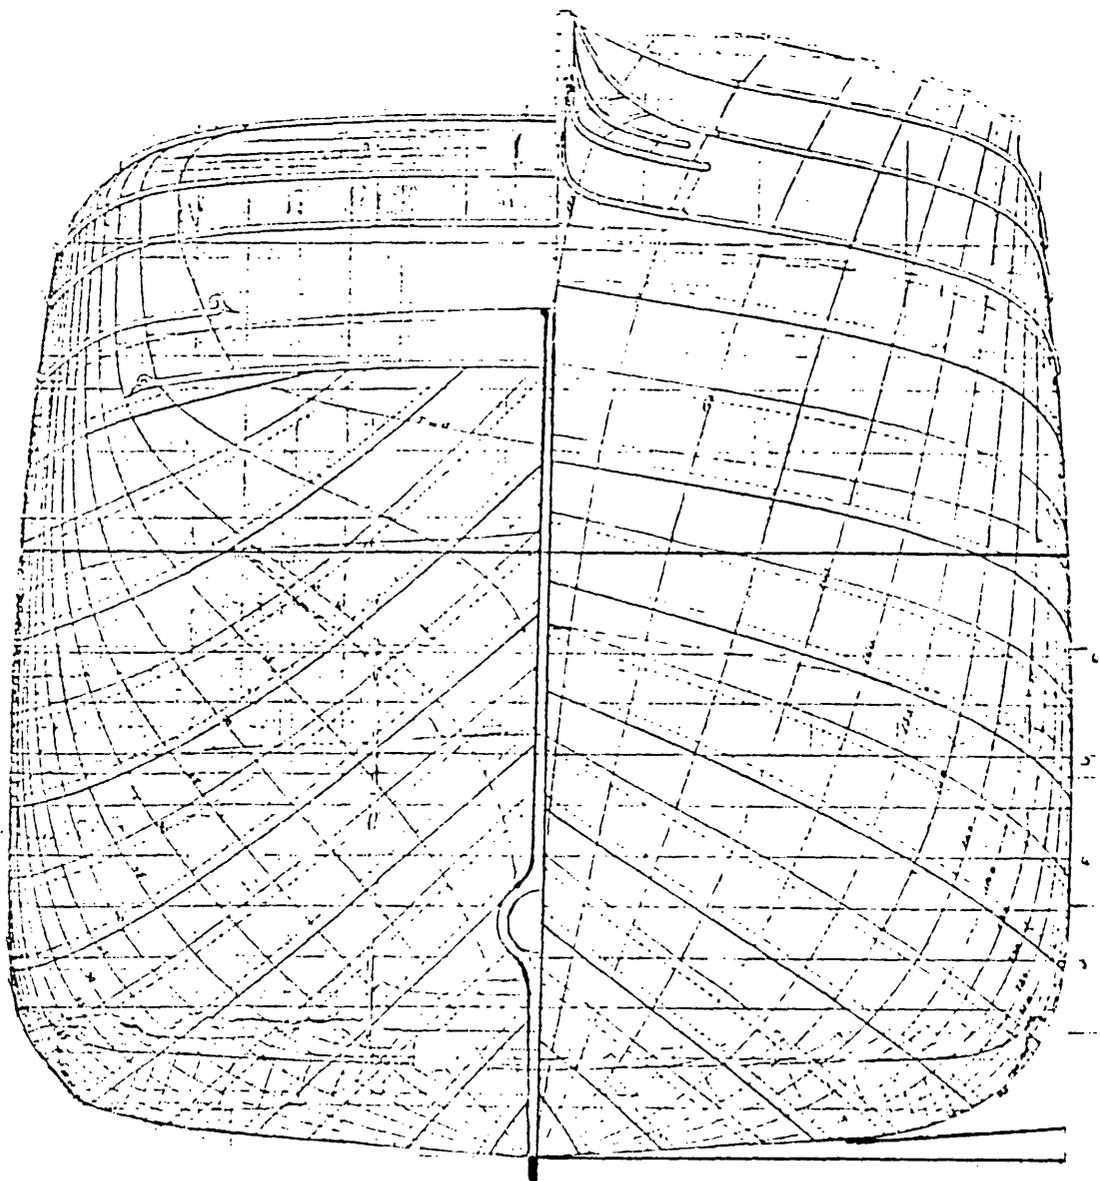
Body Plan, S.S. Antonio López. Source, all plans:
